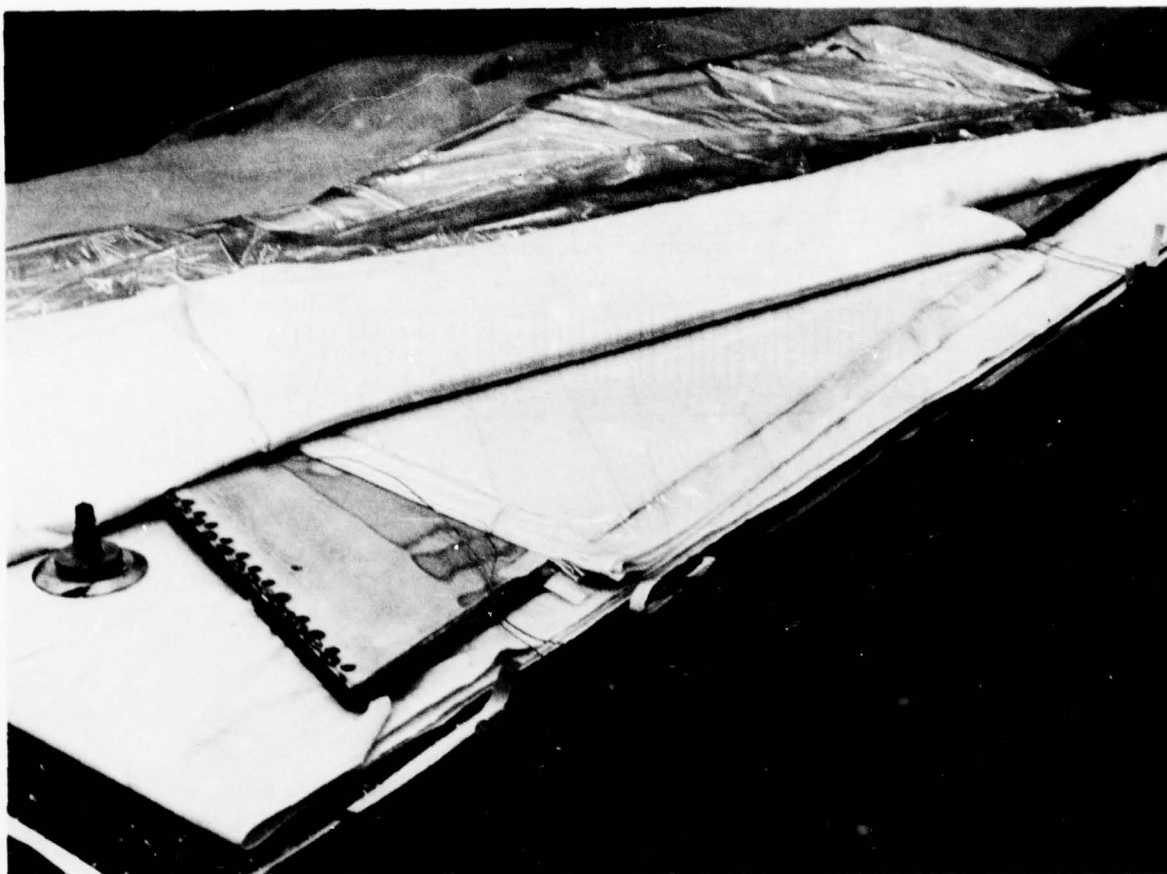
Component Being Bagged in Bond Assembly Jig
